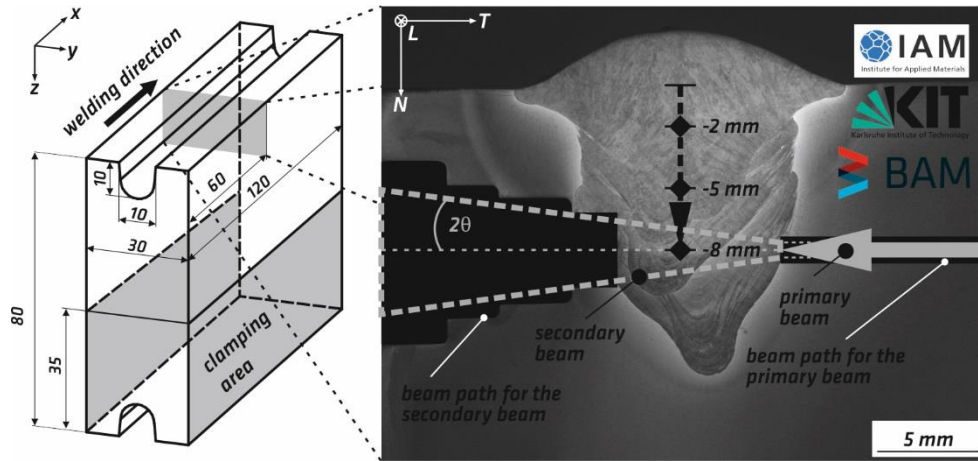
Isometric view of the sample with dimensions given in millimeter before welding (left) and cross section of the gauge area after GMA welding of the final pass (third layer), i.e. measuring position in a depth of -8 mm (right)
